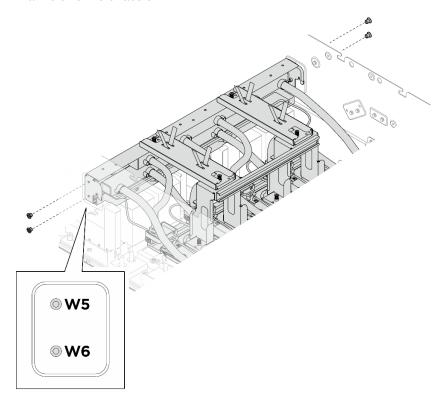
Removing the front H100/H200 GPU cold plate module manifold
